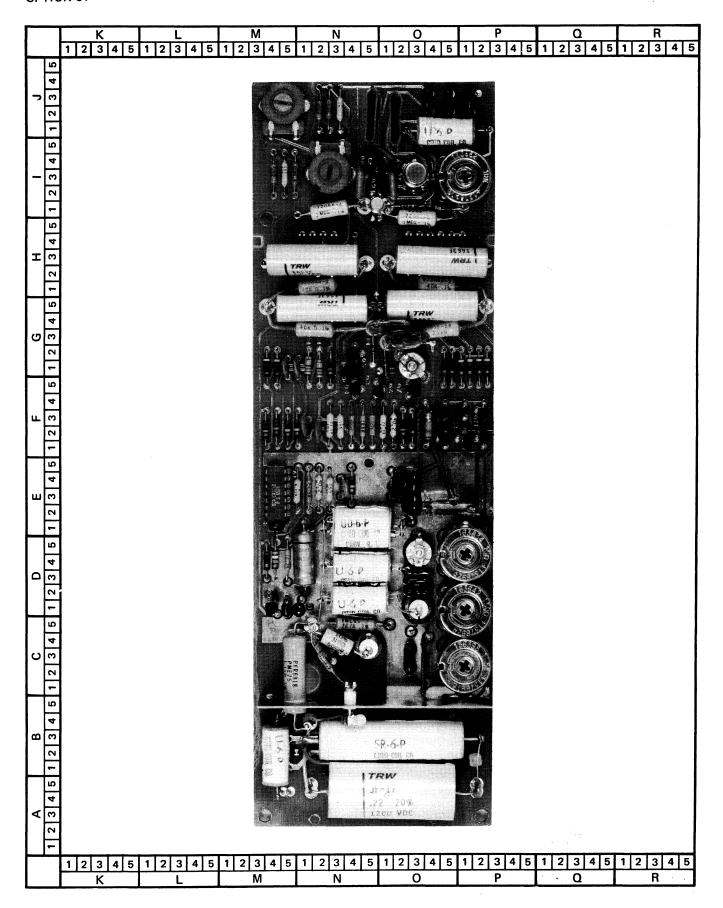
AC CONVERTER P/C ASSEMBLY
